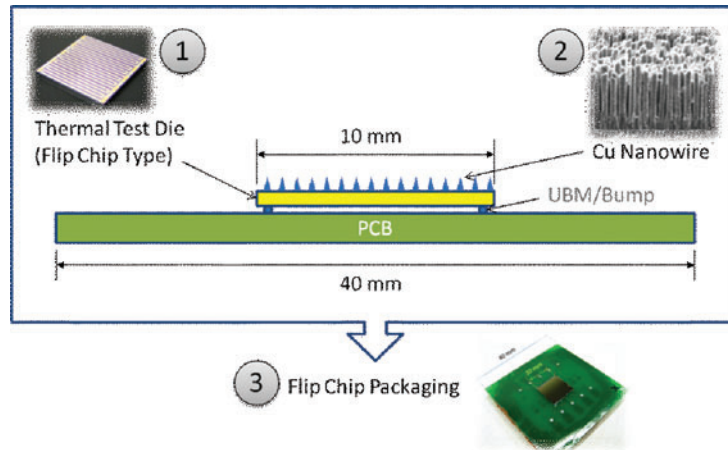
Thermal test assembly schematic showing the three parts of fabrication: thermal test die, copper nanowires, and packaging.
